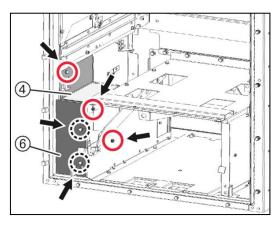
5 bolted joints on wiring duct cover, panel width 1000 mm
